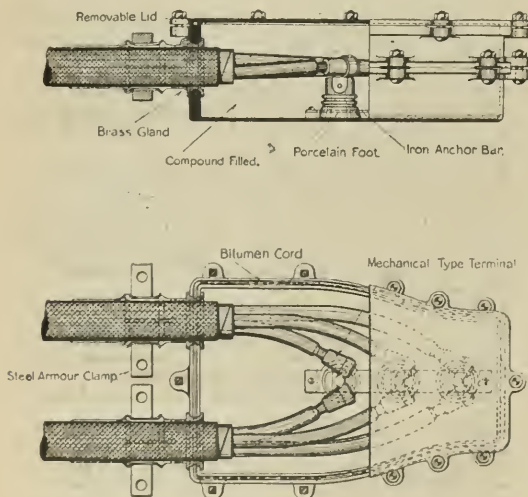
DETAILS OF SINGLE-ENDED HORIZONTAL BOX.
